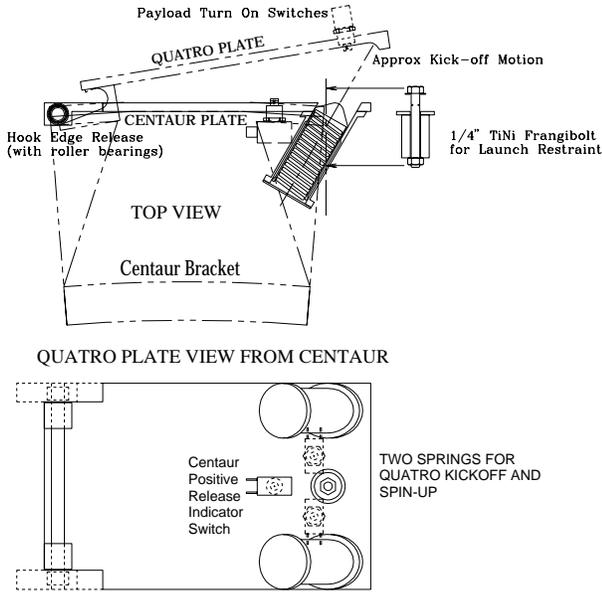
QUATRO mounting on Centaur adapter ring.
